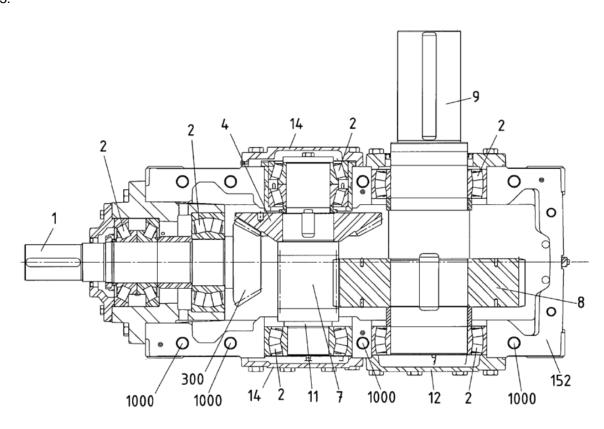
illustrates a gearing with a fixed gear ratio involving four intermeshing members, i.e. bevel gears (4) and (300) and spur gears (7) and (8). The axis of gear (300) is not parallel with the axes of gears (4), (7) and (8).
